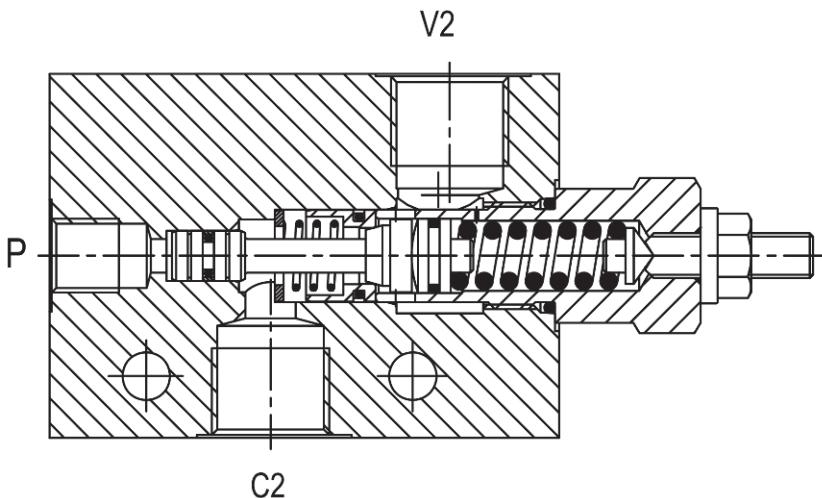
B. Section view of a counterbalance valve (Bosch Rexroth Oil Control)
